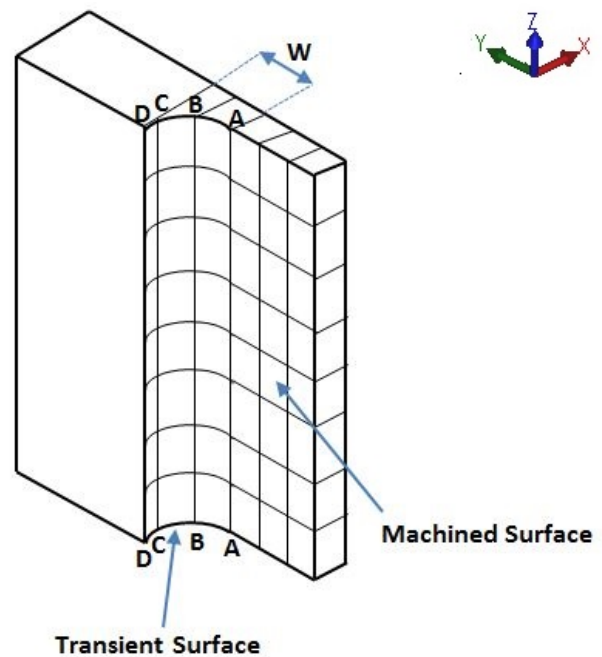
shows the considered surfaces of the workpiece in the milling operation as transient surface and machined surface for analysing by the FEM.
